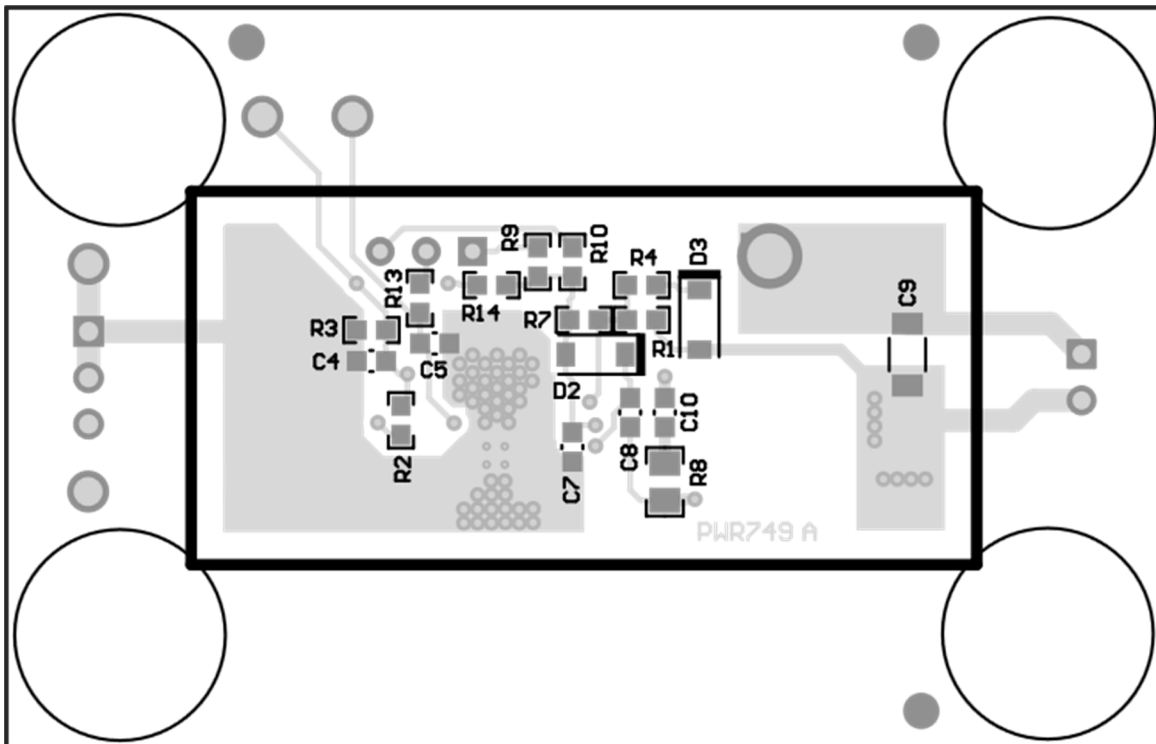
Bottom Layer and Bottom Overlay (Bottom View)
